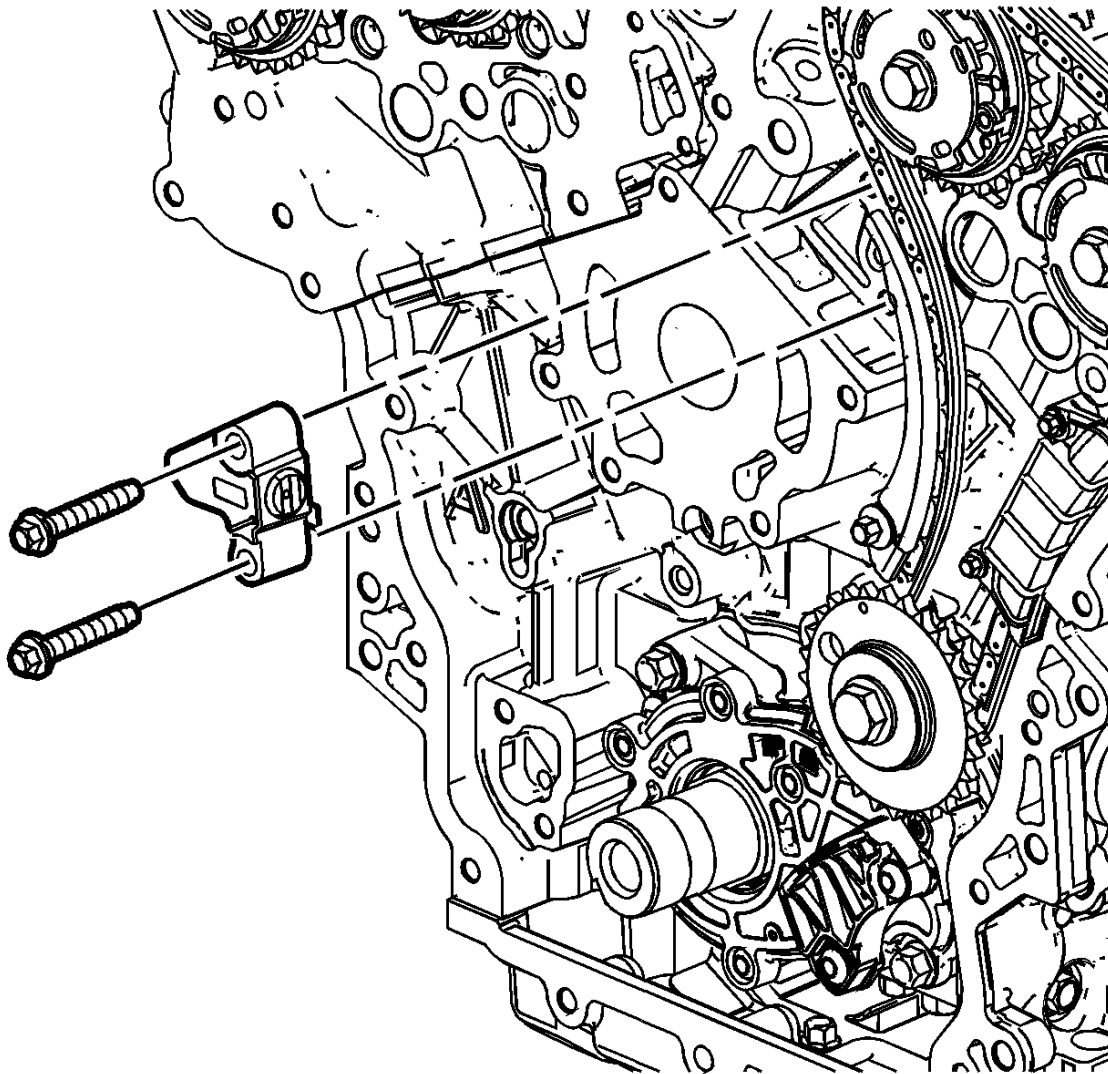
Left Bank Secondary Camshaft Drive Chain Tensioner
